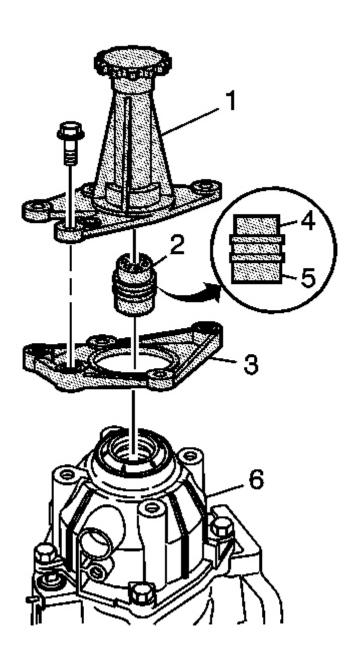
Installing J 33381-A Into Input Clutch Housing Courtesy of GENERAL MOTORS CORP.
